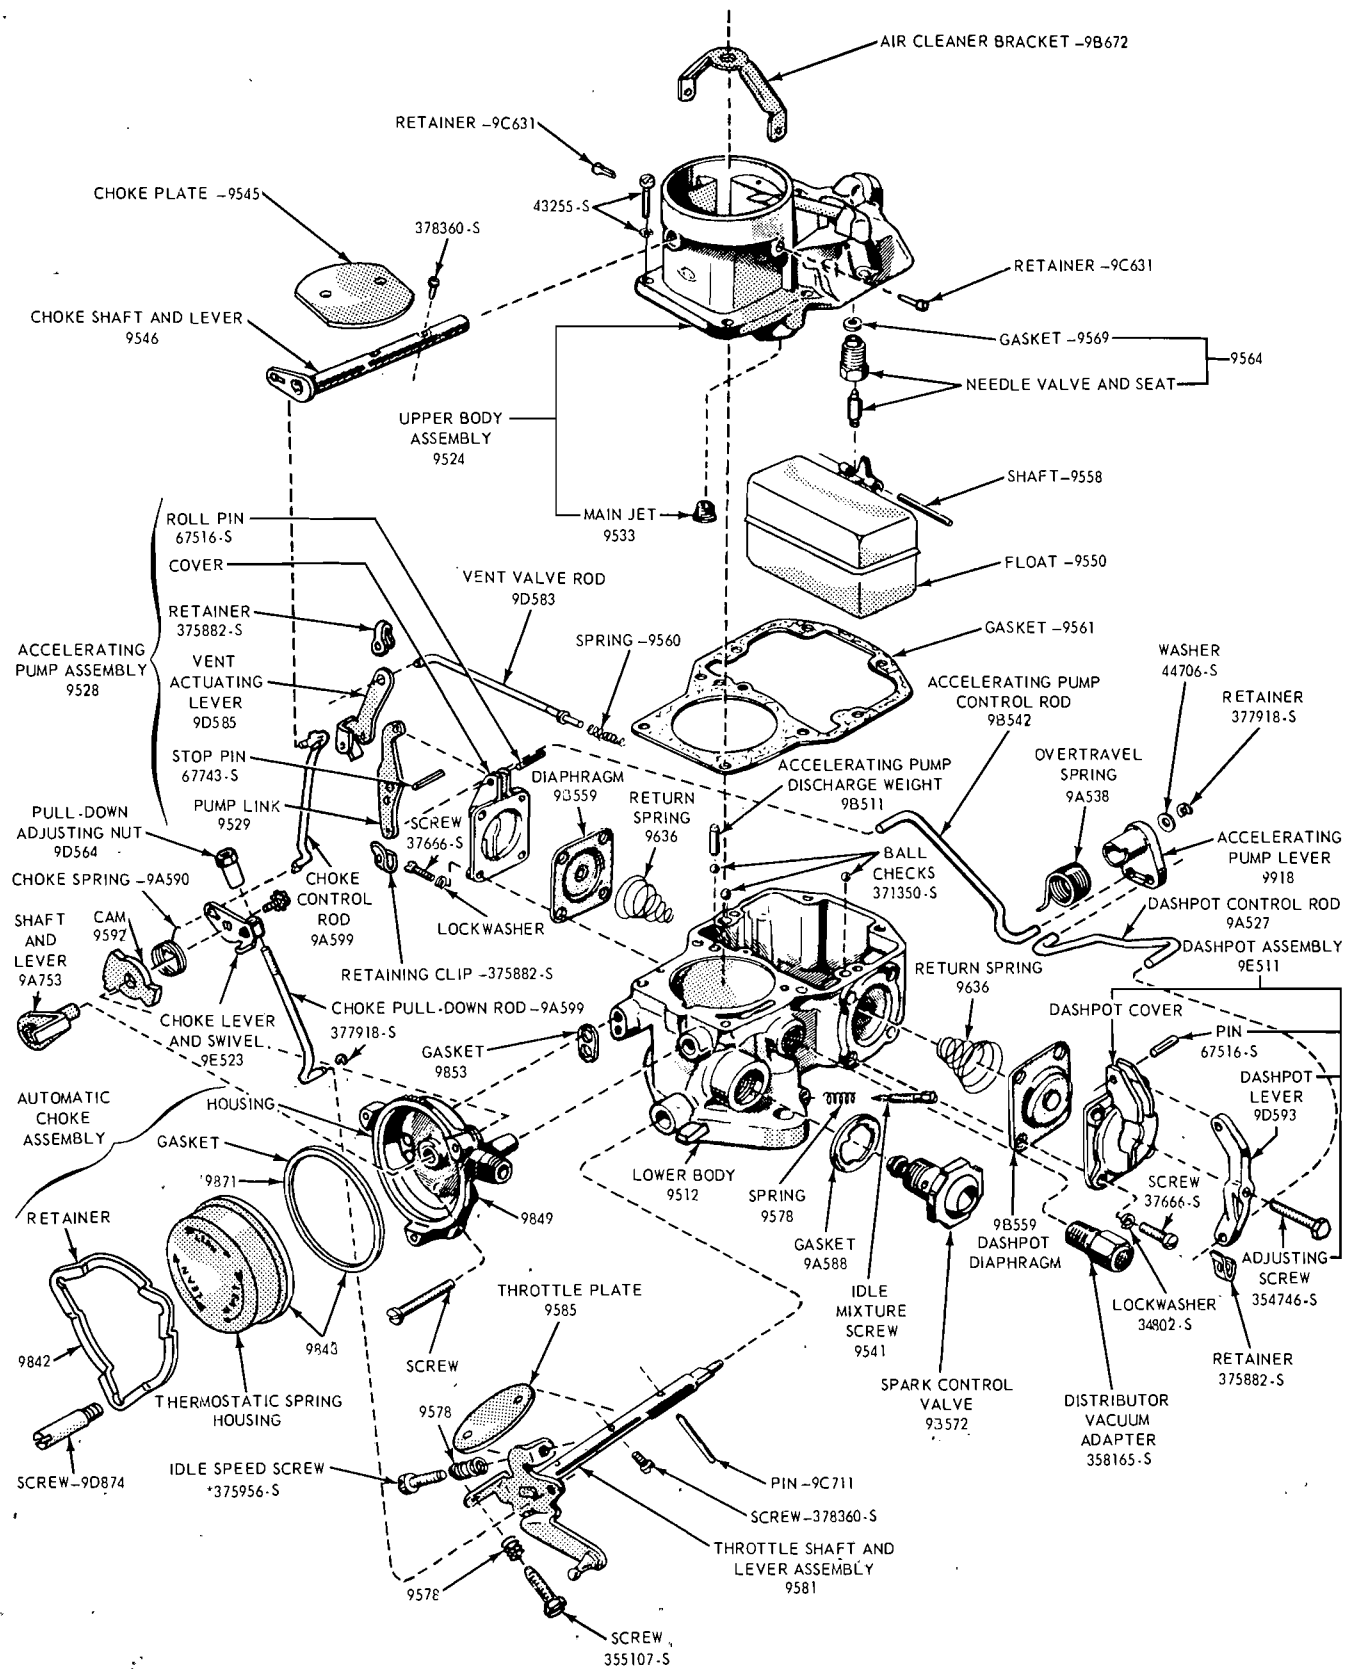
Autolite Model 1100 1-V Carburetor Assembly
